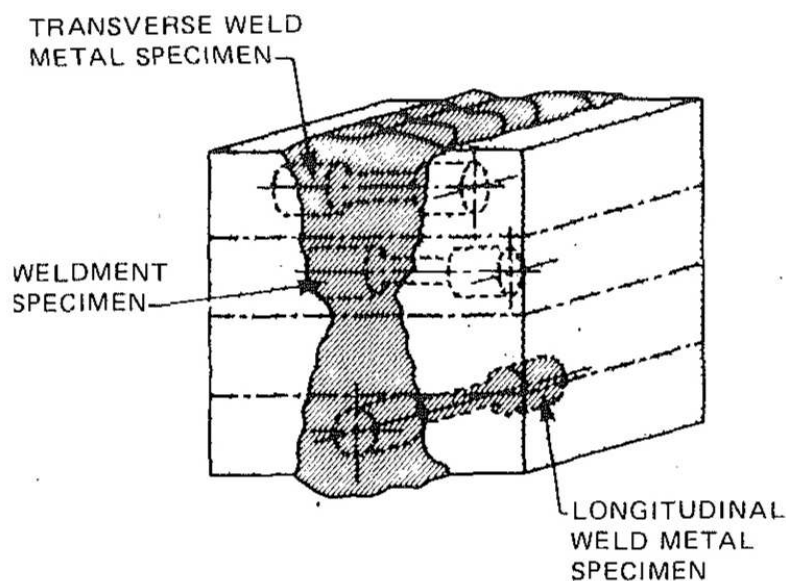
Weldment fatigue specimen types (Corum 1990).
